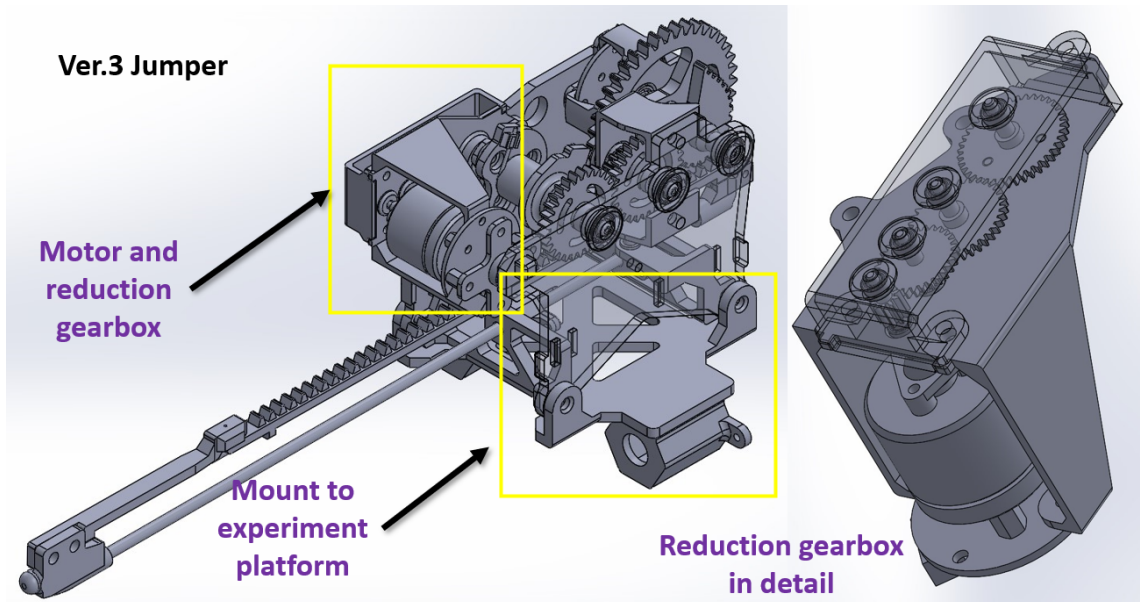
The Ver.3 of the jumper prototype. The motor with reduction gearbox has been added to the jumper. On the right side of the figure is a close up view of the integrated motor-gearbox module. Mounting frames are also added to the back on the jumper to be mounted onto the experiment platform.
